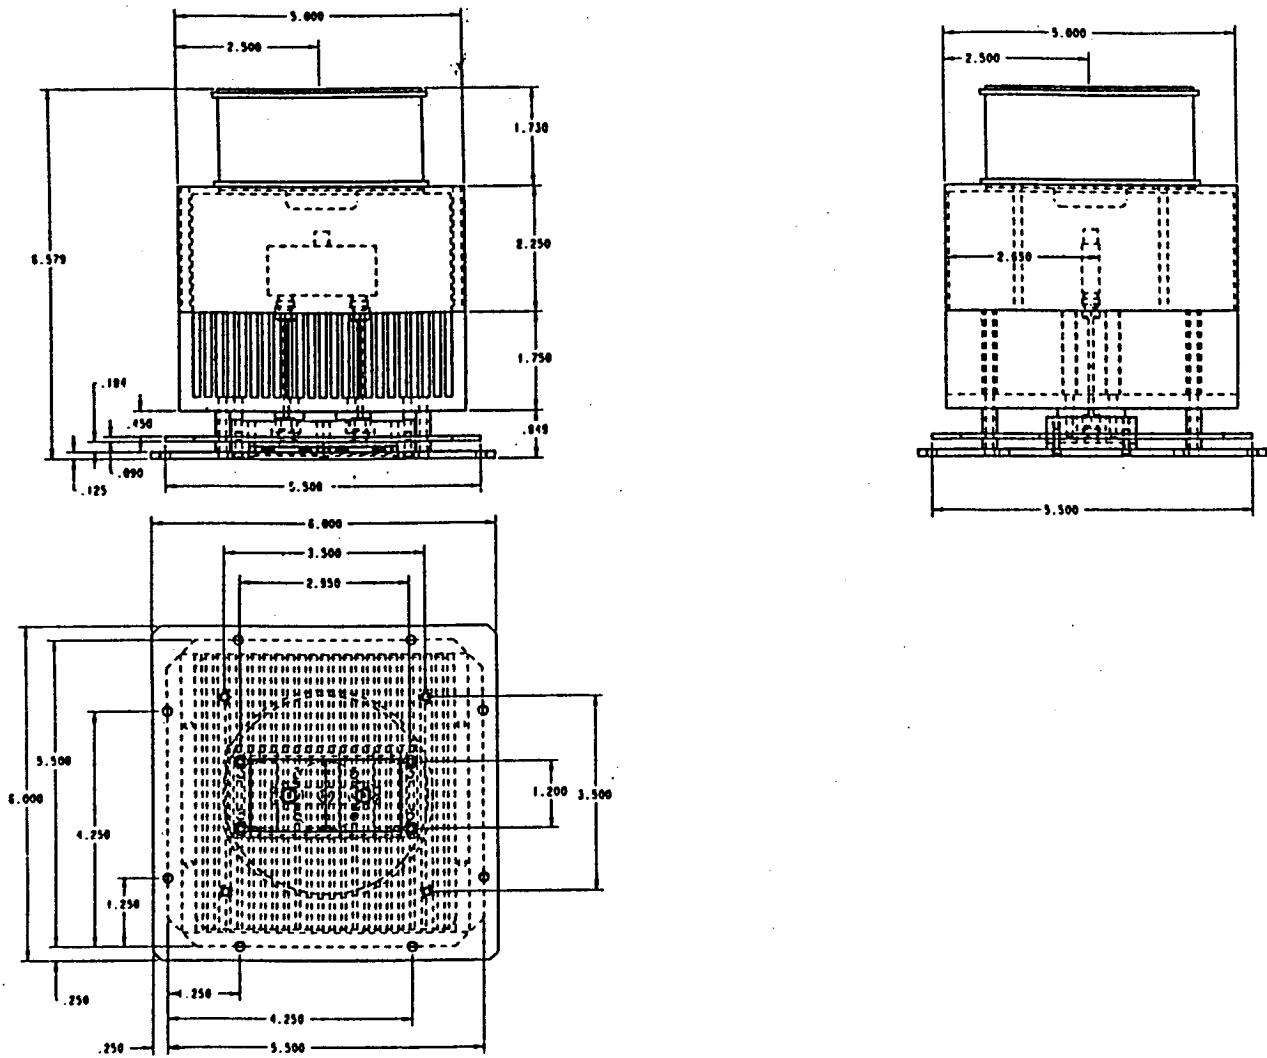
Mechanical Layout of the 32 Element Array Assembly
